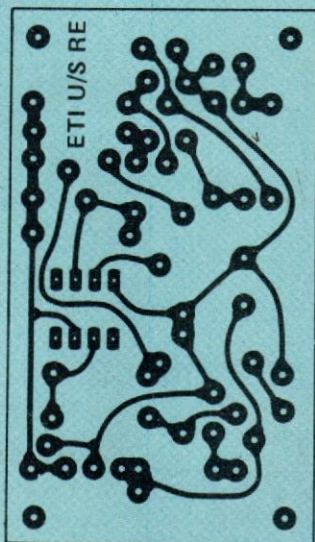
Printed circuit board of receiver. Full size 70 x 40mm.
